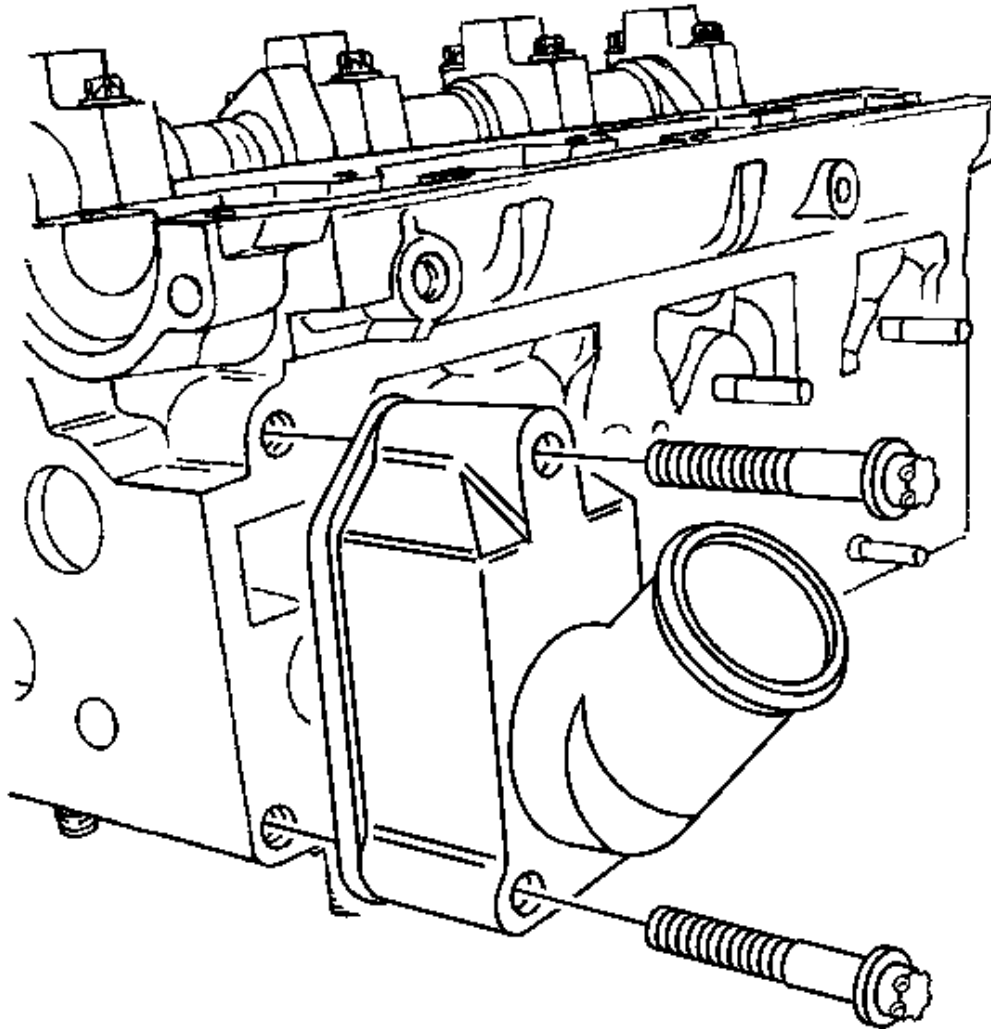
View Of Coolant Bypass Housing And Mounting Bolts
